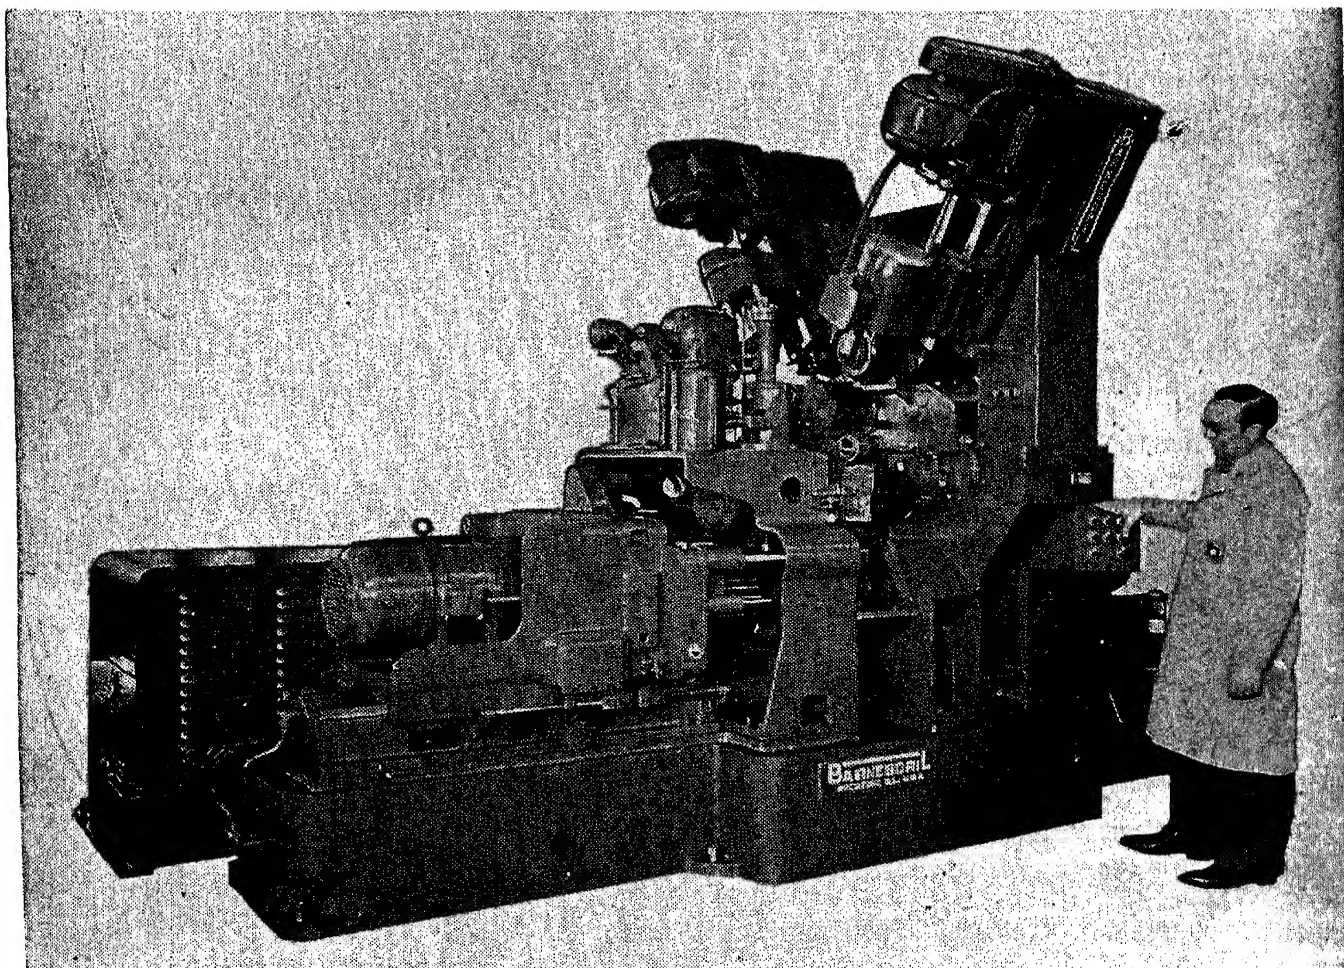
A special multiple spindle high production drilling machine with six heads. (Courtesy Barnes Drill Co.)
